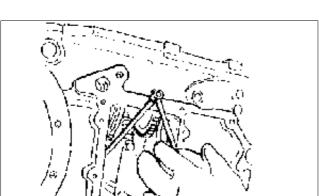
Locate the lubrication pipeline internally of the transmission housing, making the connection to the coupling positioned on the bevel pinionshaft. The line is secured by screwing the nut onto the coupling.
